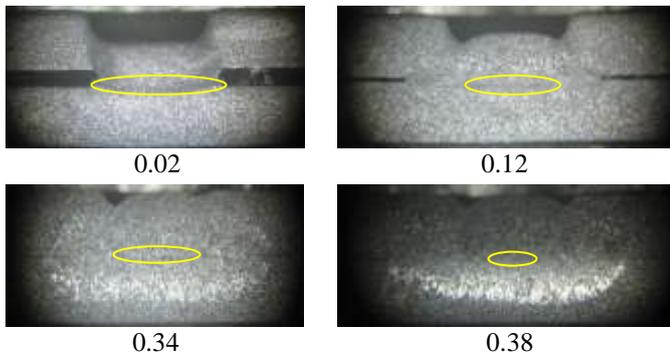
The separating line between the parts in the center of the contact of the two parts when a common annular weld instead of the coin-shaped nugget is formed.
